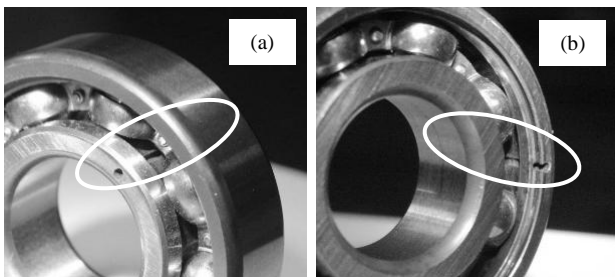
Bearing with localized defect of (a) inner race and (b) outer race.
